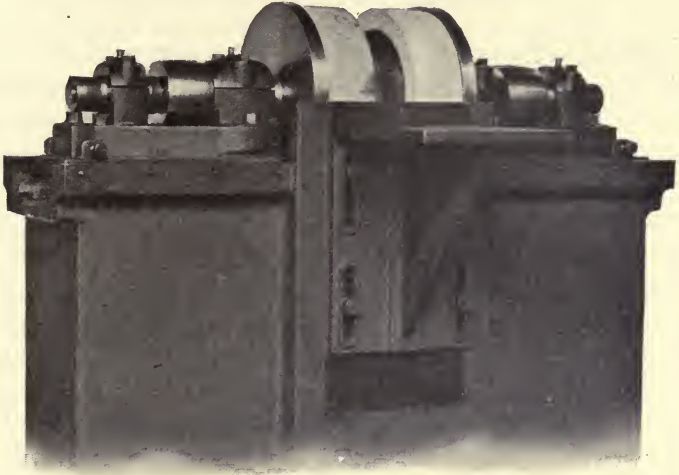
GUEST DOUBLE HEAD GRINDER
